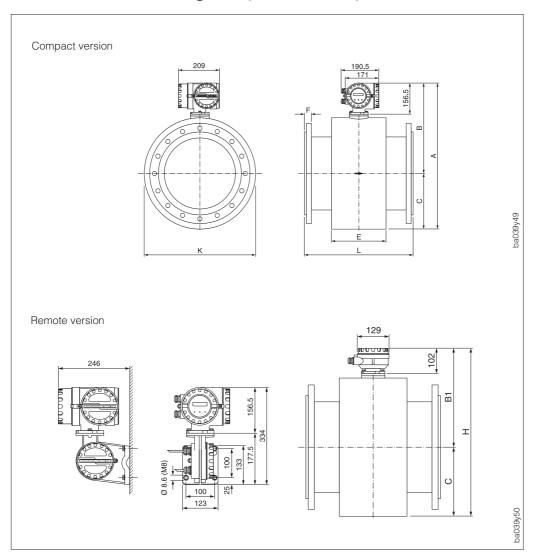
Dimensions Promag 30 F (DN 350...2000)
